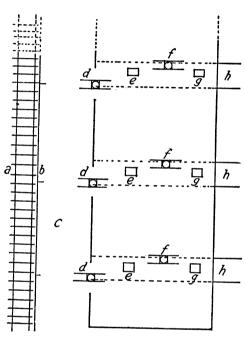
Plan of Auld & Conger Co. roofing slate mill: a, Track for bringing blocks of slate; b, compressed-air line; c, space for block makers; d, rotating racks for slate blocks; e, splitters; f, rotating rack for split roofing; g, trimmers; h, belt conveyor for waste.
